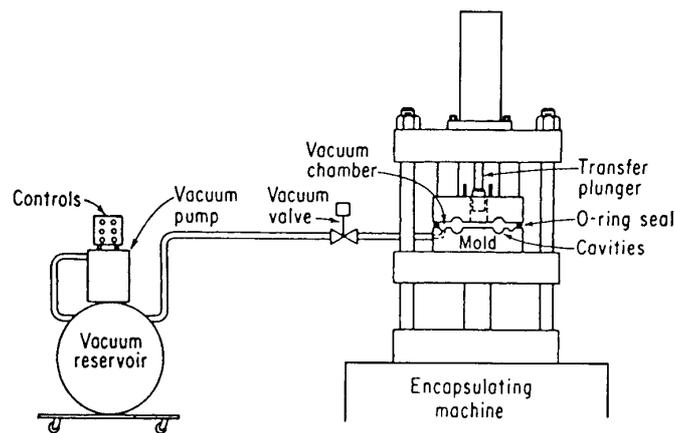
Schematic diagram showing principle of vacuum venting with transfer molding. (Courtesy Hull Corporation)
